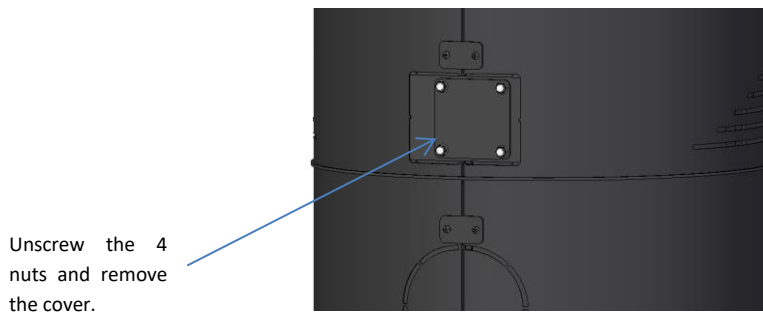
Rear view of the equipment; (M) section to remove for external air inlet
